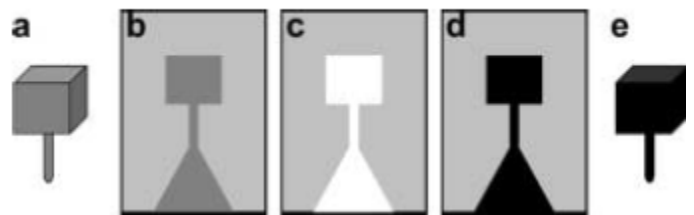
Micro investment casting process, a: plastic pattern, b: embedded in ceramic slip, c: hollow form, d: gold filled mold, e: cast part.
